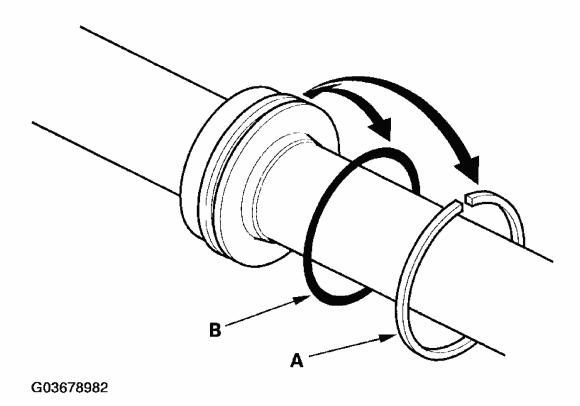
Prying Piston Seal Ring And O-Ring Off Rack Piston Courtesy of AMERICAN HONDA MOTOR CO., INC.
